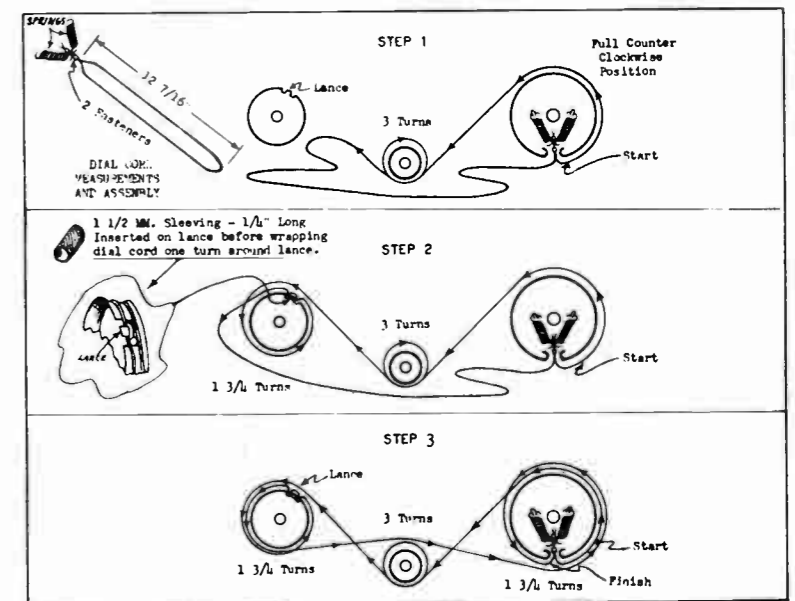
DIAL CORD STRINGING CHASSIS 120174-B
